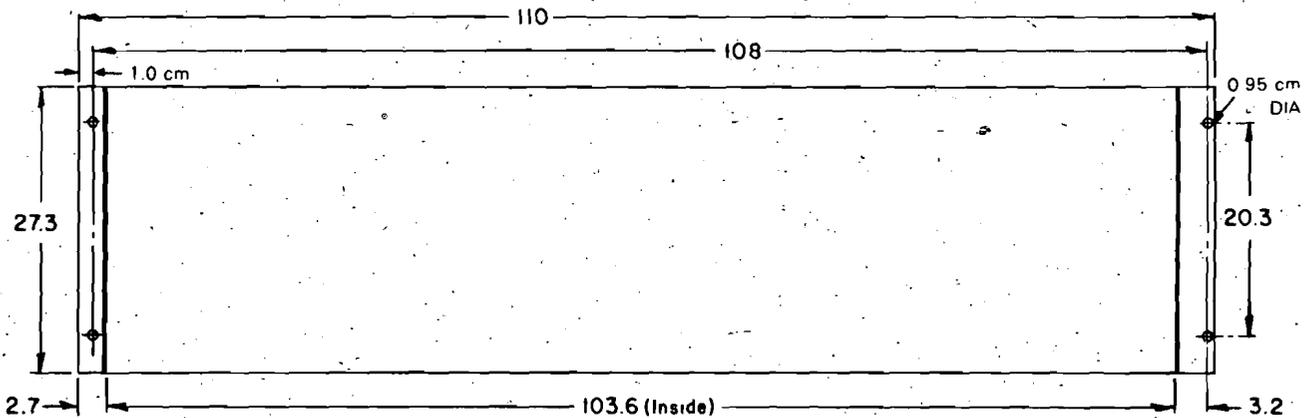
DUMMY SPECIMEN IN SPECIMEN HOLDER
